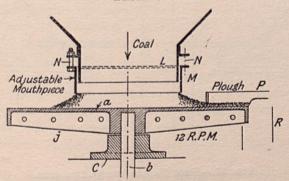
FEED TABLE AND MOUTHPIECE.
